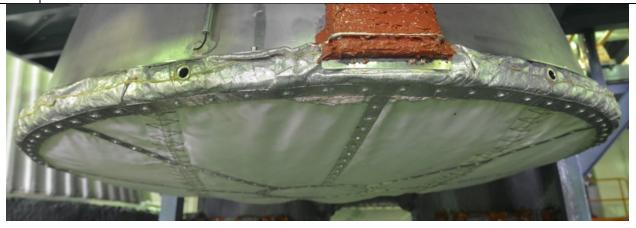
Nozzle closure system assembly with L110 Nozzle
